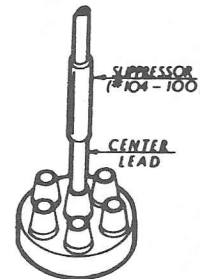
DISTRIBUTOR SUPPRESSOR INSTALLATION
